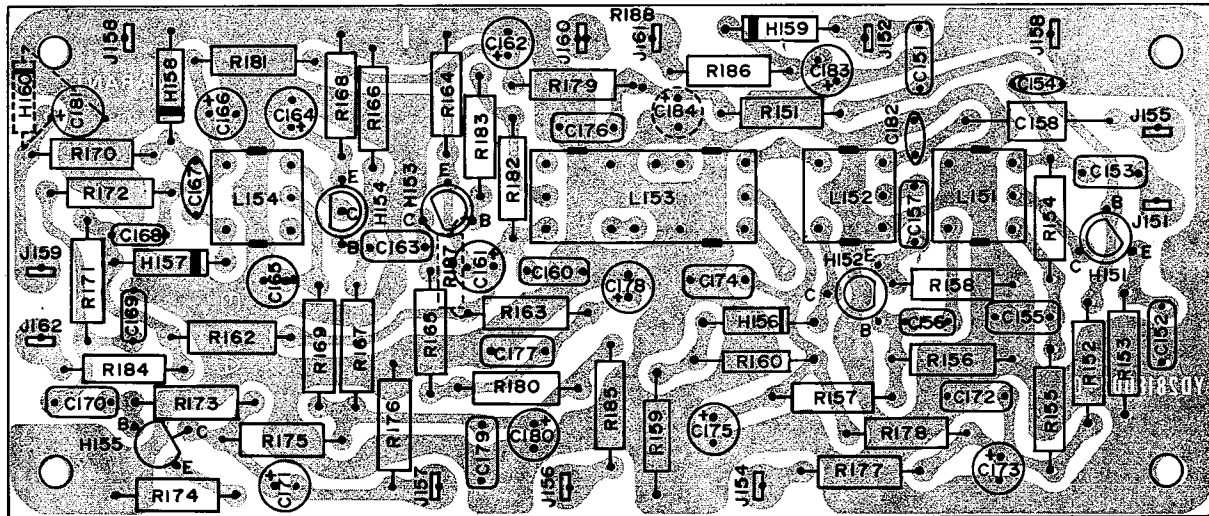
AM Tuner Unit Assembly P150 Component Locations
